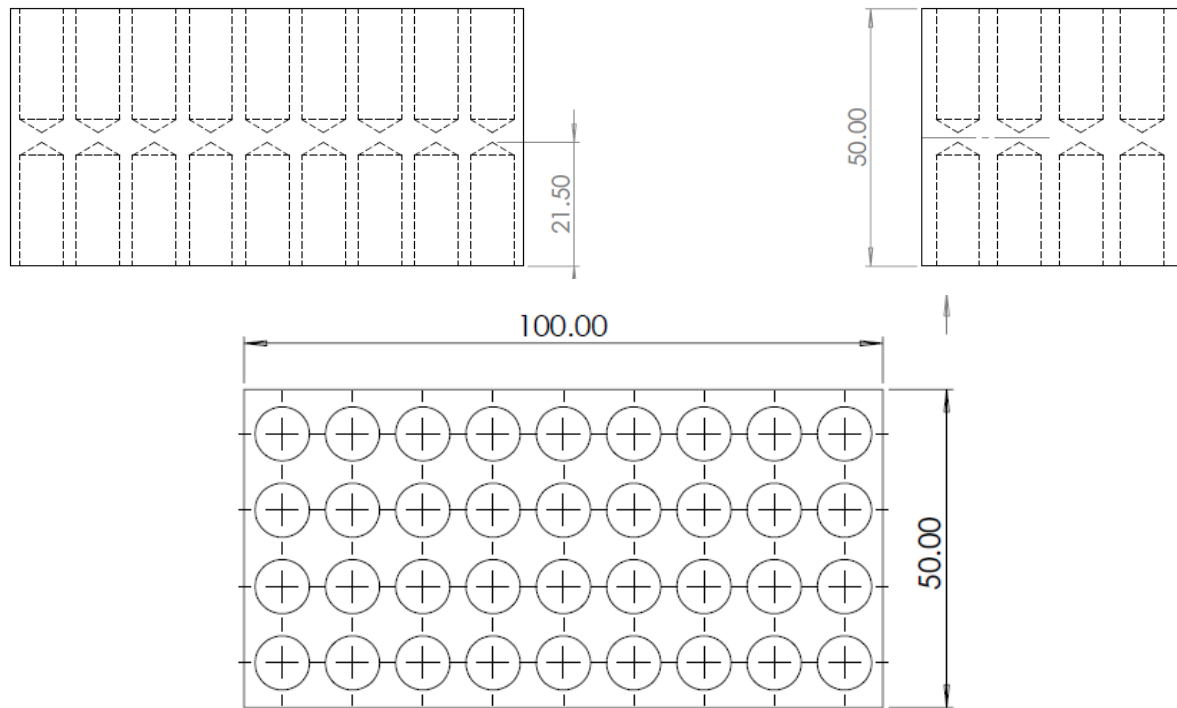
An example of drilling operation plan on CAM software in machining Inconel 718
